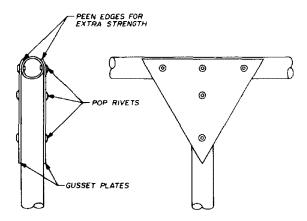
Gussett plate detail. Gusset plates are not necessarily all the same shape.
